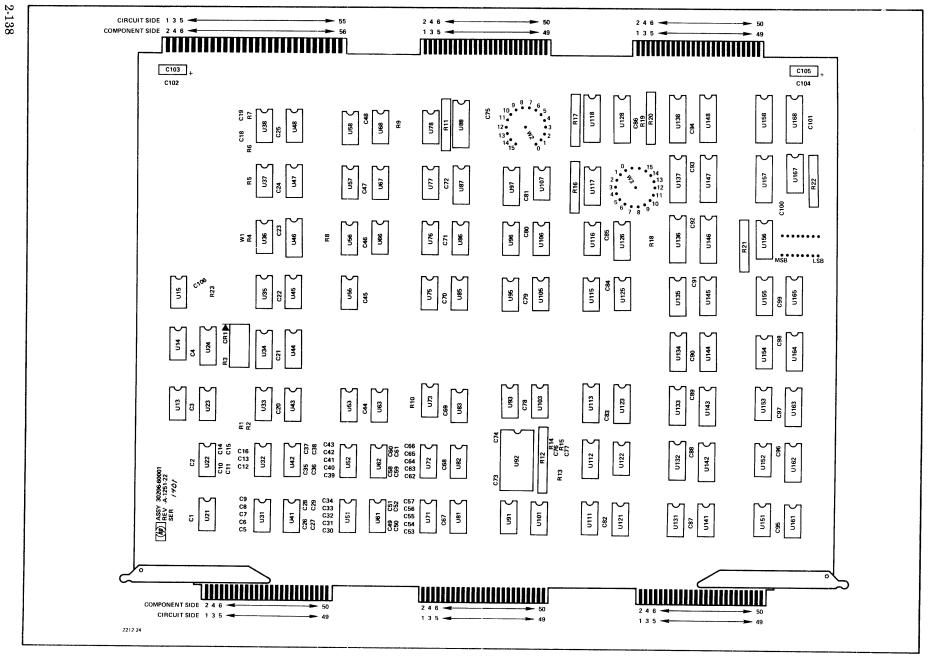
Card Reader Interface PCA, Parts Location Diagram
